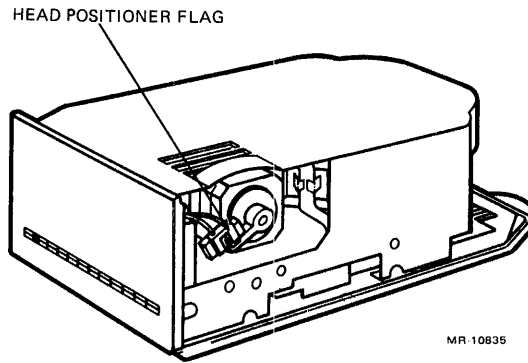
RD51 Disk Drive Head Positioner Flag
